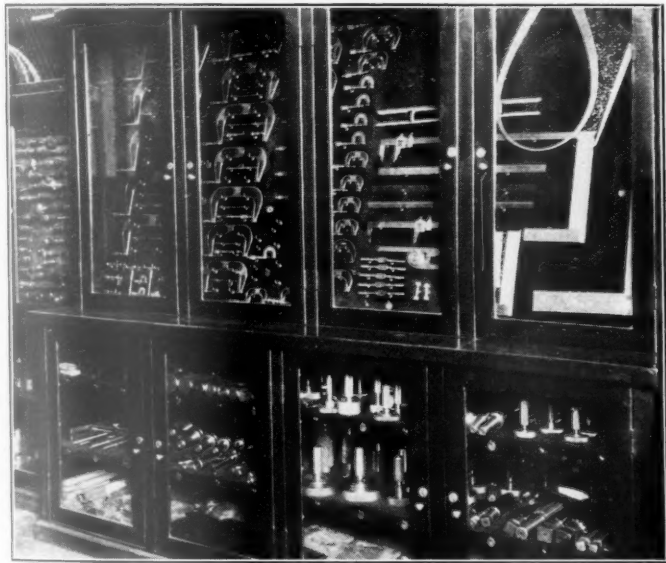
Micrometer Calipers Shown in This Case Are Given Out on Checks.
